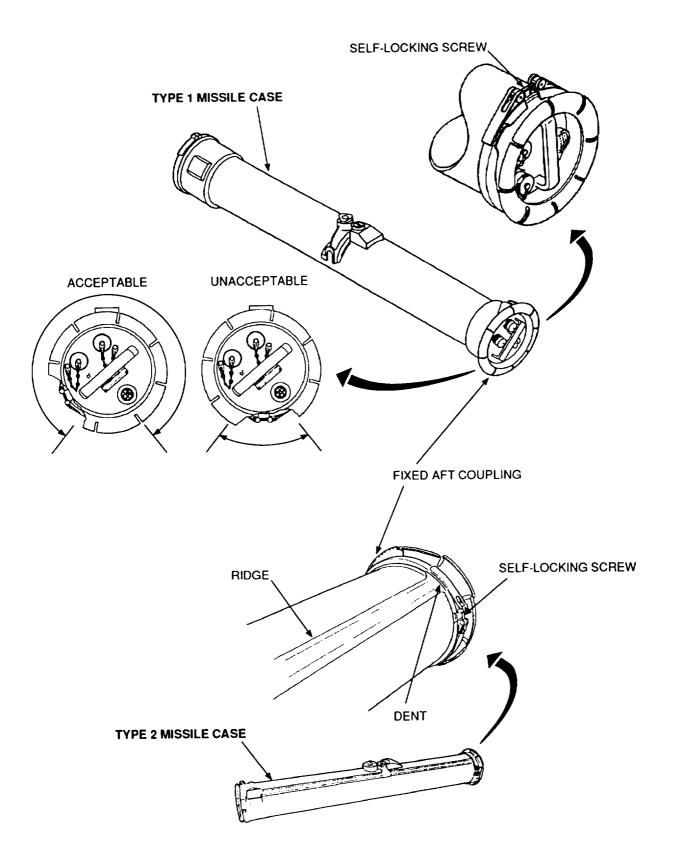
Missile Simulator Inspection Points (Sheet 2 of 2)
